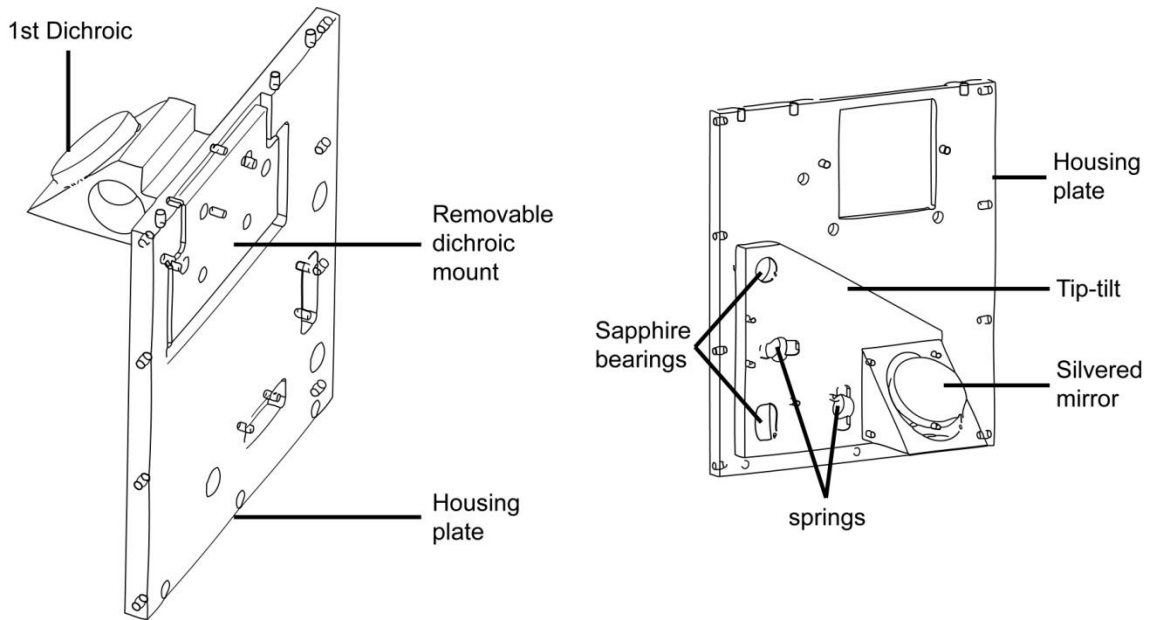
Mechanical design for dichroic holders and silvered mirror tip-tilt adjustment mechanism. Left: One of the two removable dichroic holders. Right: One of the two tip-tilt assemblies mounted with three bearings and two springs (one bearing is behind the mirror and cannot be seen here)
